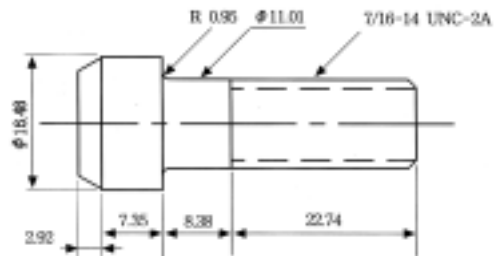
Schematic drawing of 7/16-14 UNC spring screw.
